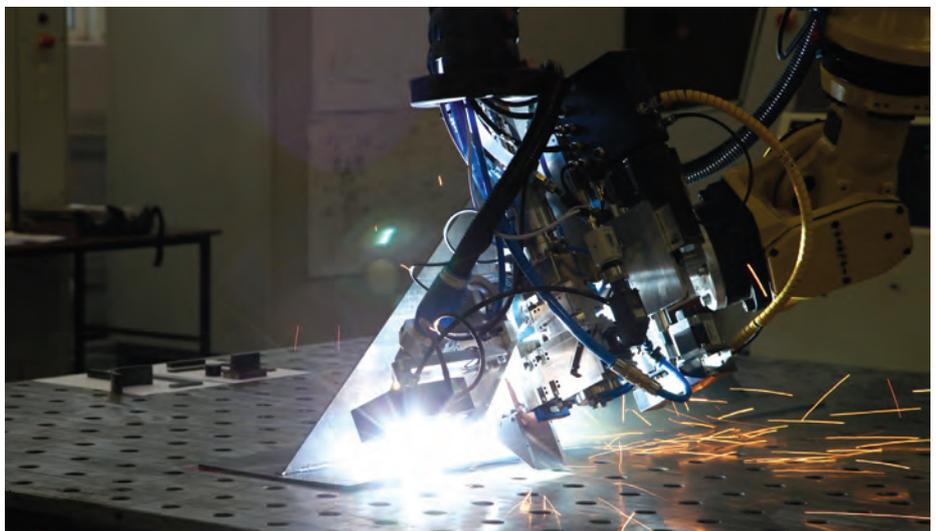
Robotized system for laser cutting and welding in various positions
